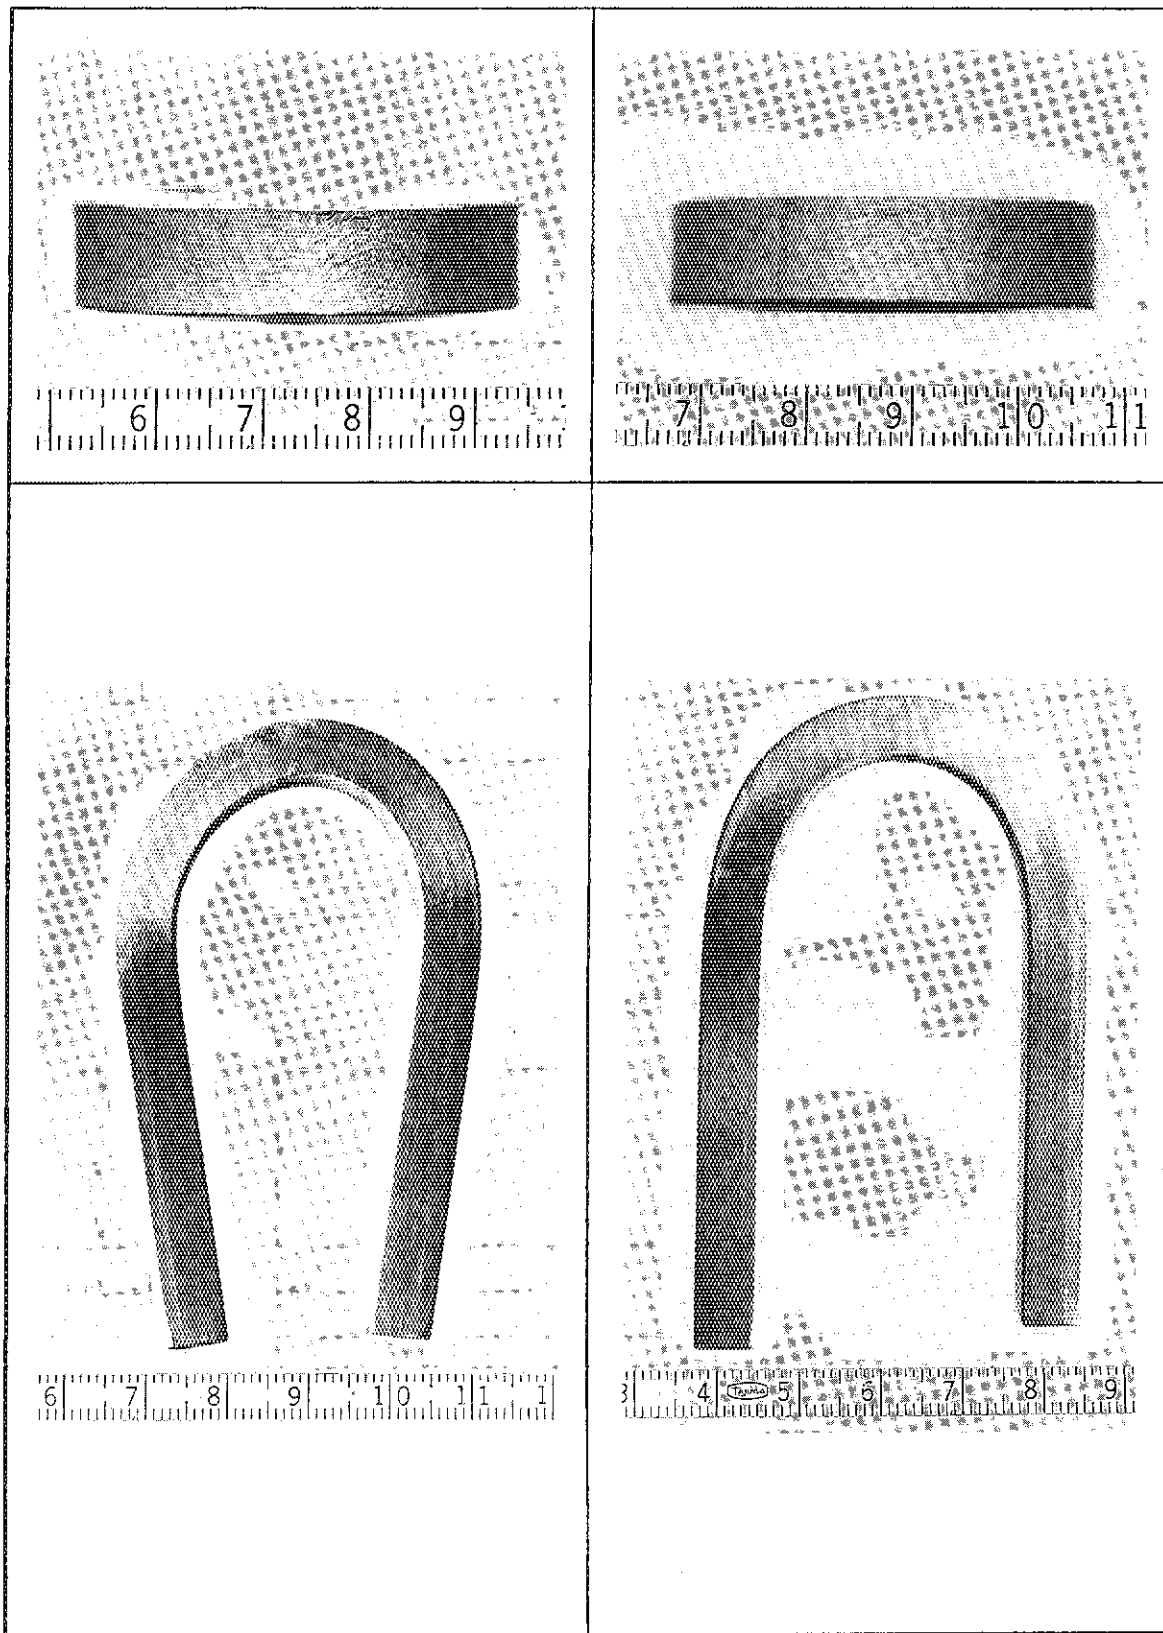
Specimen appearance after free bend test for Hastelloy Alloy XR welded joint
